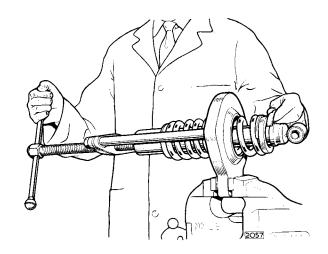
Removing the rear road spring from the hydraulic damper with Churchill Tool No. J.11 A in conjunction with SL.14
